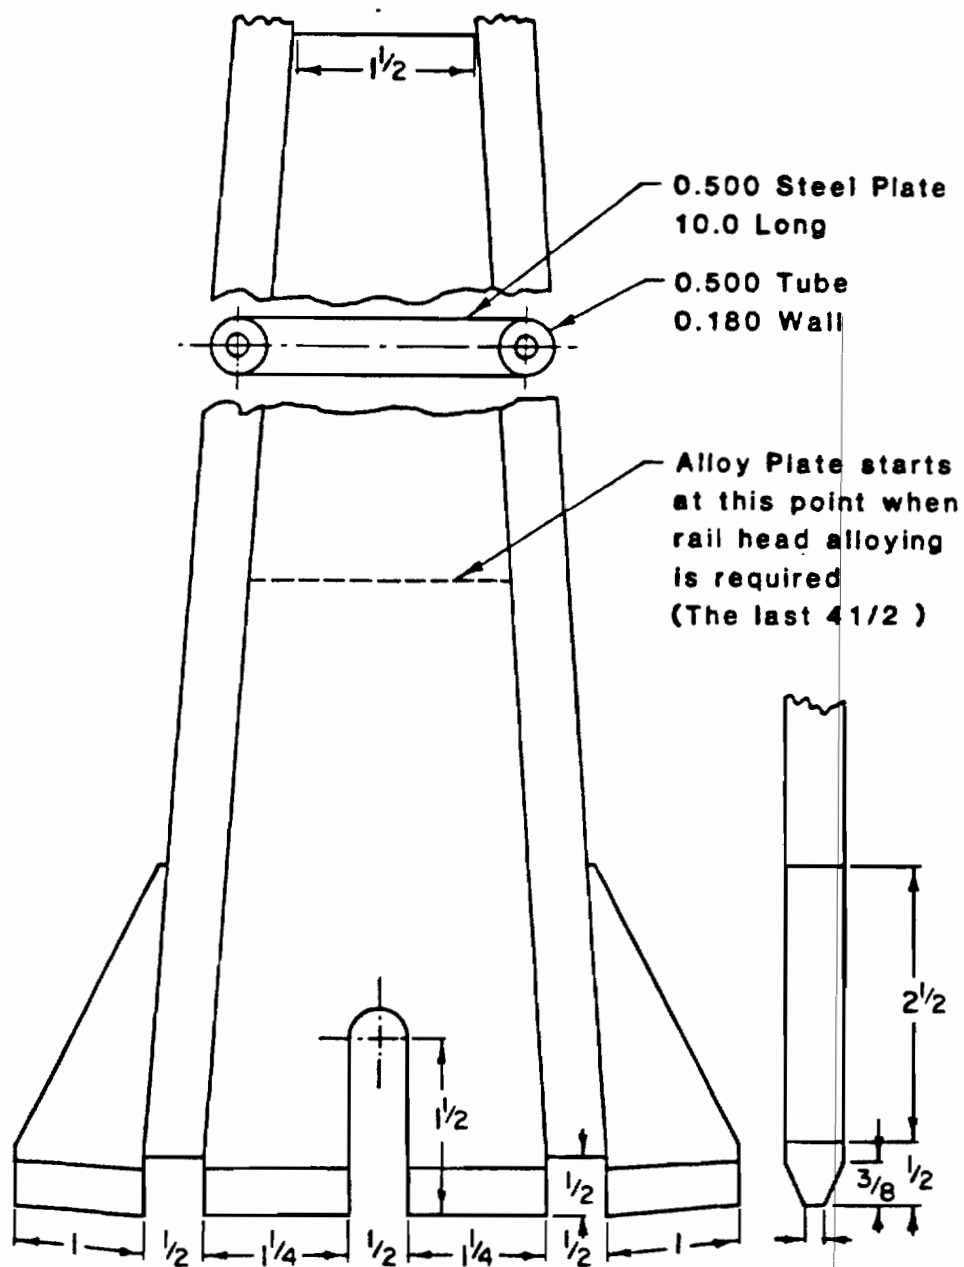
ELECTROSLAG RAIL WELD PLATE GUIDE TUBE DESIGN.
